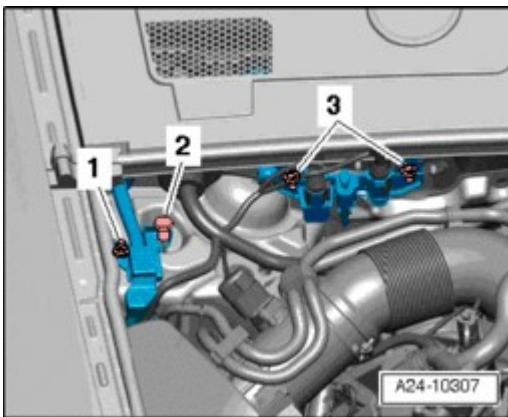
Identifying Radiator Fan Cowl Connectors, Coolant Fan Control (FC) Thermal Switch -F18- Connectors & Radiator Cowl
